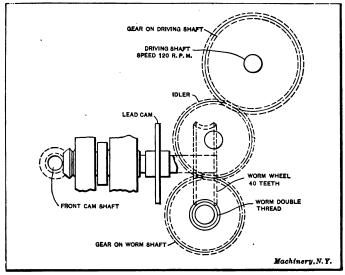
Diagram of Gearing on the No. 00 Brown & Sharpe Automatic Screw Machine
